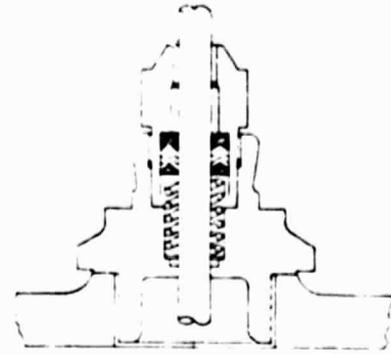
psi Packing for 1-1/2 to 3 in. Screwed Valve Bodies.
